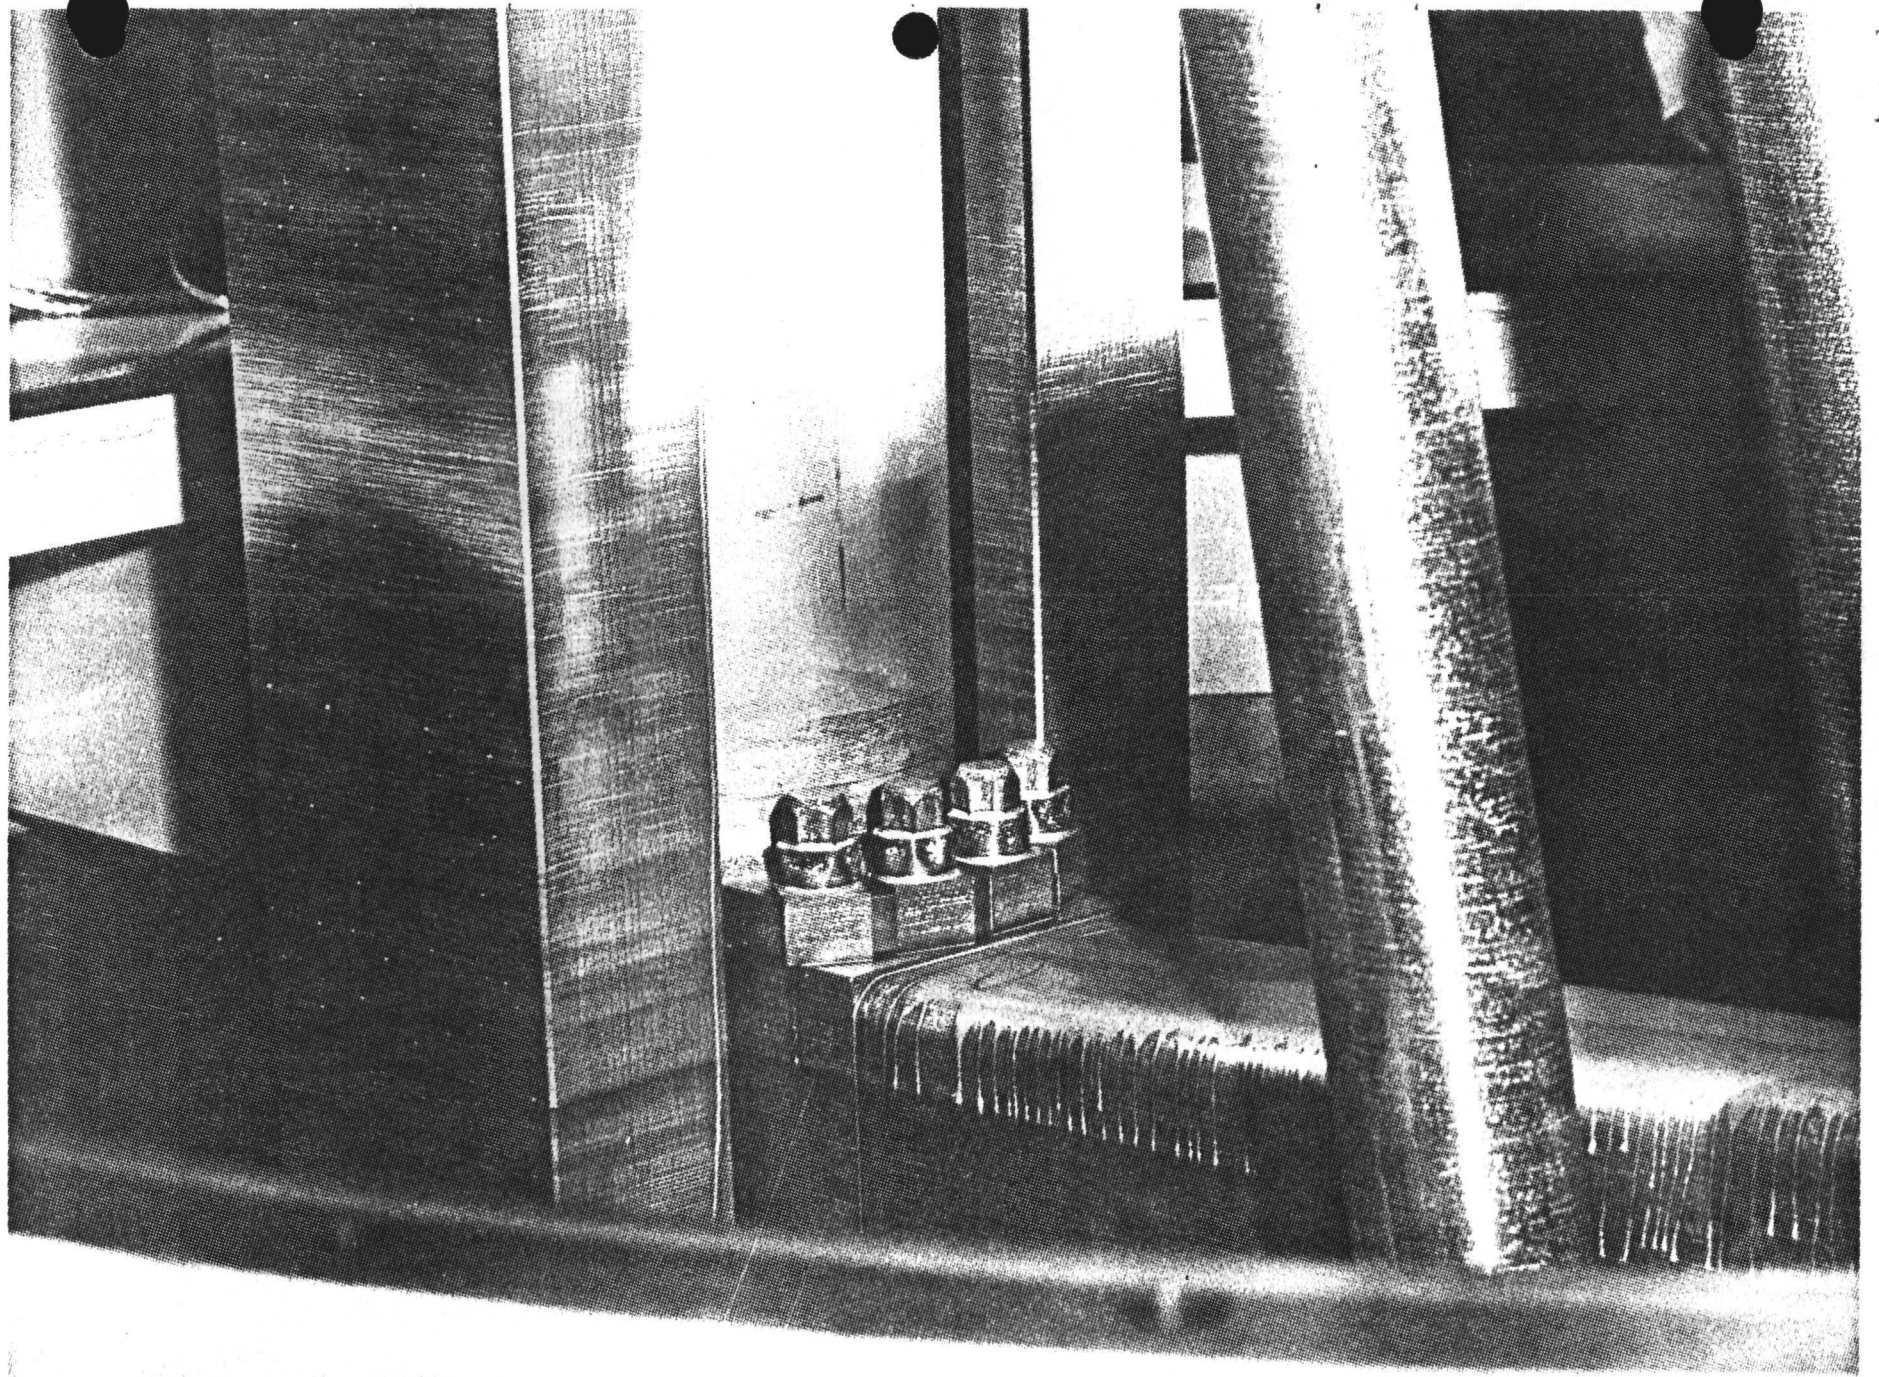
Grapple Support Arm of the In Vessel Handling Machine- Upper Surface.
